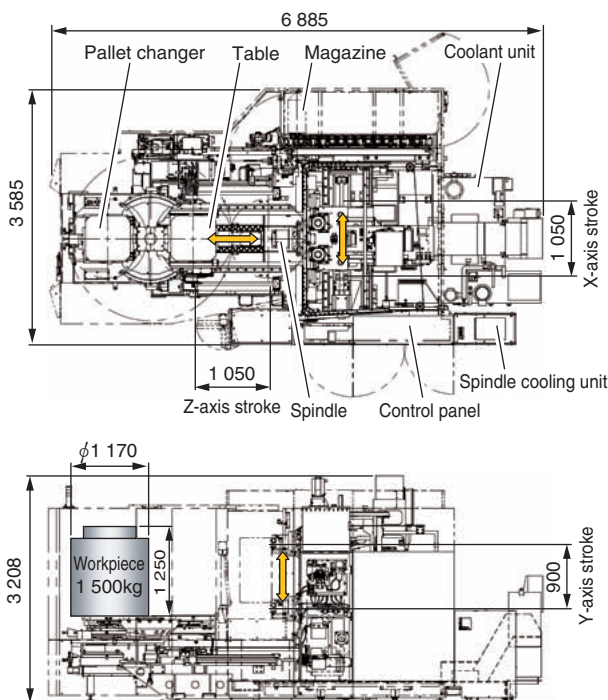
FH630SX-i Horizontal Spindle Machining Center
